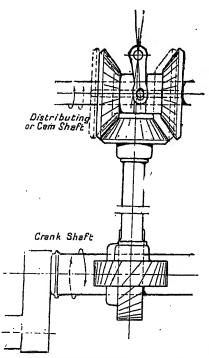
Discarded system for reversing Valve Gear by means of two Sliding Bevel Wheels.
